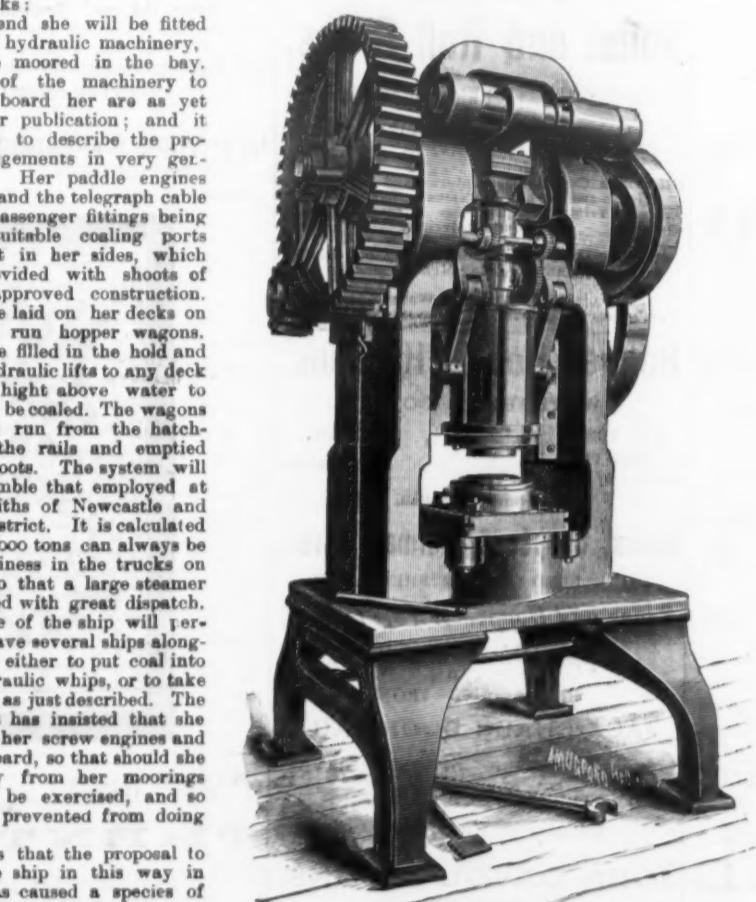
Toggle-Joint Sheet-Metal Drawing Press.
